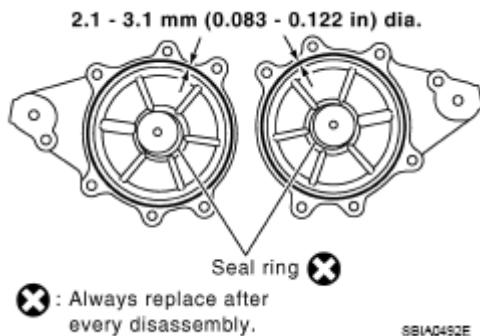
Identifying Bead Of Liquid Gasket With Tube Presser To Intake Valve Timing Control Covers
